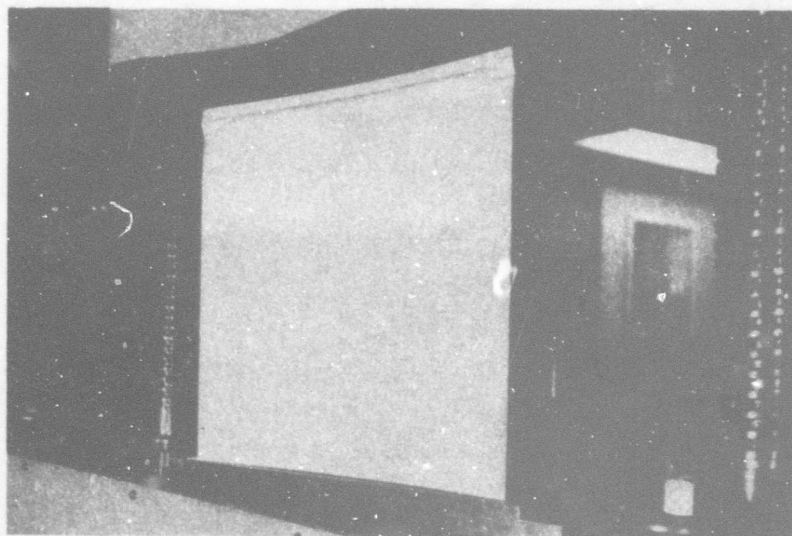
MODE OF FAILURE OF PANEL 4 TESTED IN EDGEWISE COMPRESSION AT ROOM TEMPERATURE. FAILURE WAS SHEAR CRIMPING AT THE EDGEMEMBER - CORE TRANSITION PLANE
